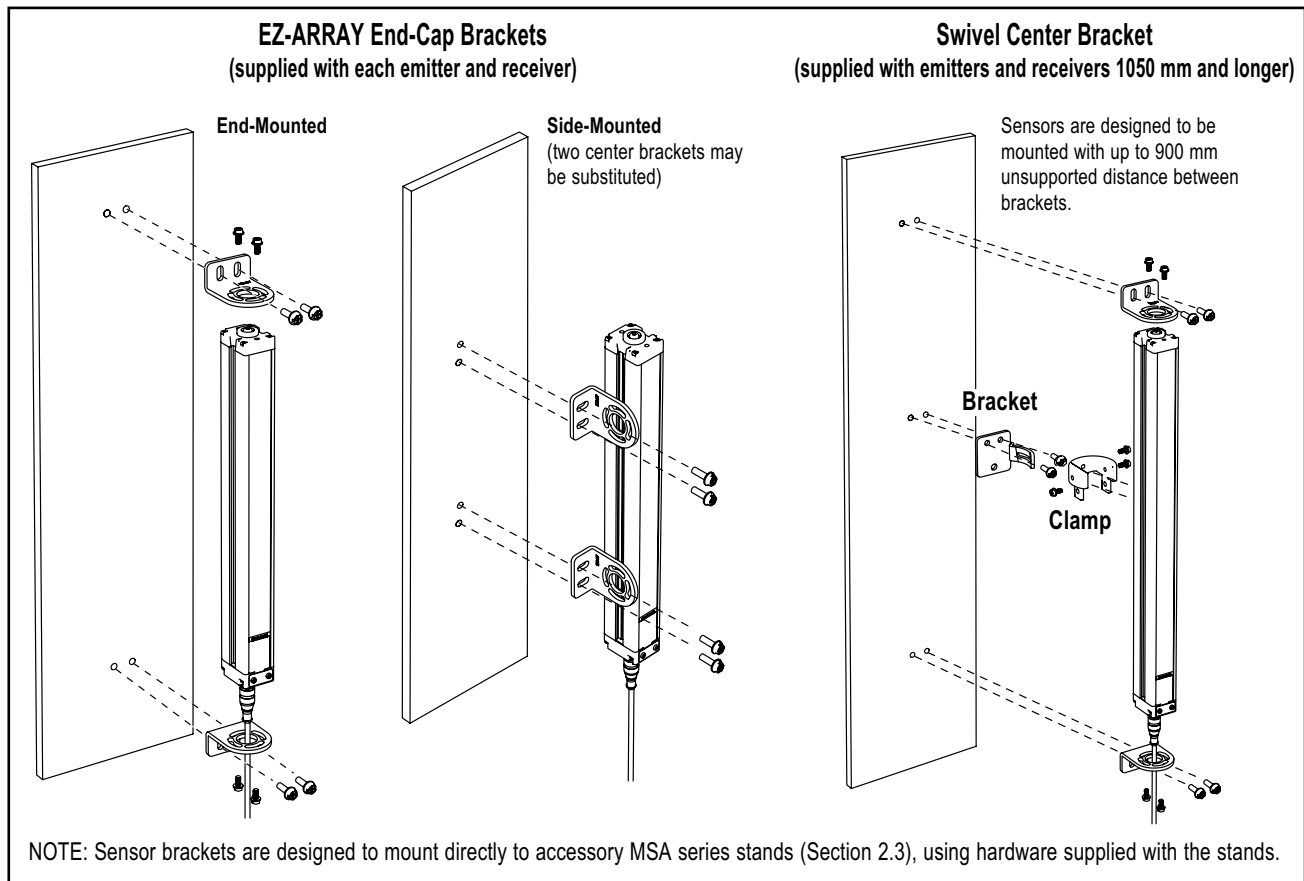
A-GAGE EZ-ARRAY emitter and receiver mounting hardware
